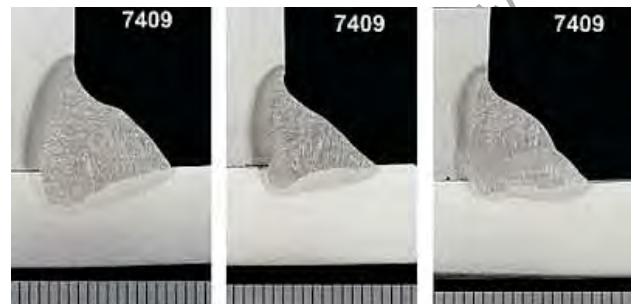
Macrosections of 10mm leg length fillet welds. From left to right: A single pass tandem weld made at a travel speed of 600mm/min, a single pass single wire weld made at a travel speed of 300mm/min and a three-pass single wire weld made at 600mm/min
